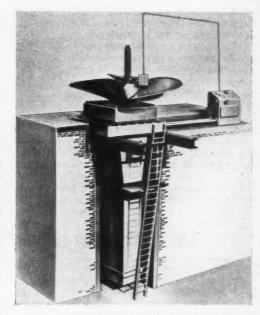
Model of a large Fromag keyseating machine for marine propellers
